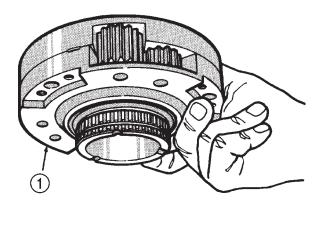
Installing Mainshaft Bearing Rollers and Spacers
